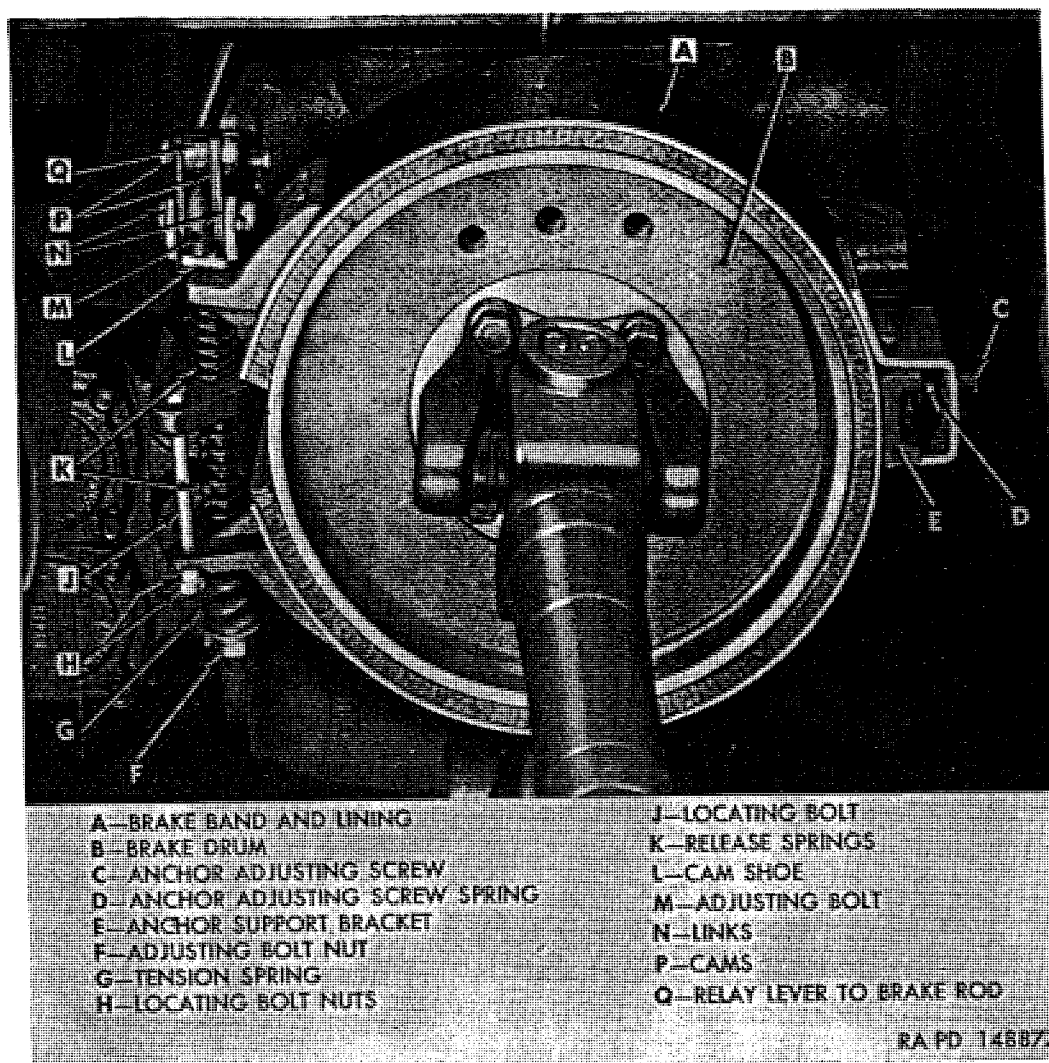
Parking brake drum, band, and linkage installed on transfer.
